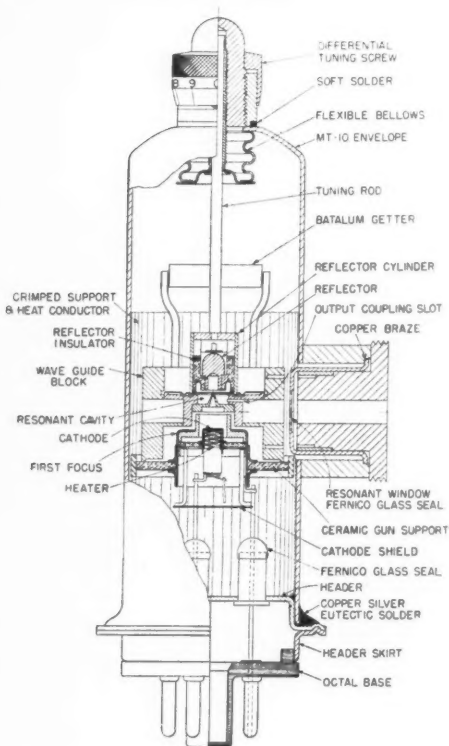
Cross-sectional drawing showing the construction of the Z-668 tube.
